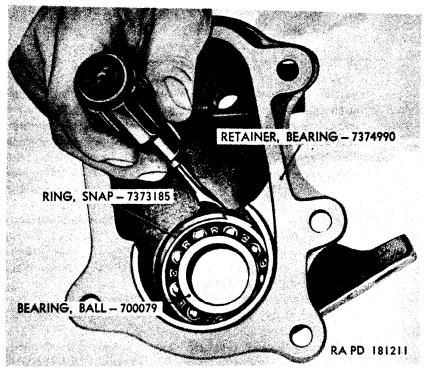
Removing transfer front axle output shaft bearing snap ring.
